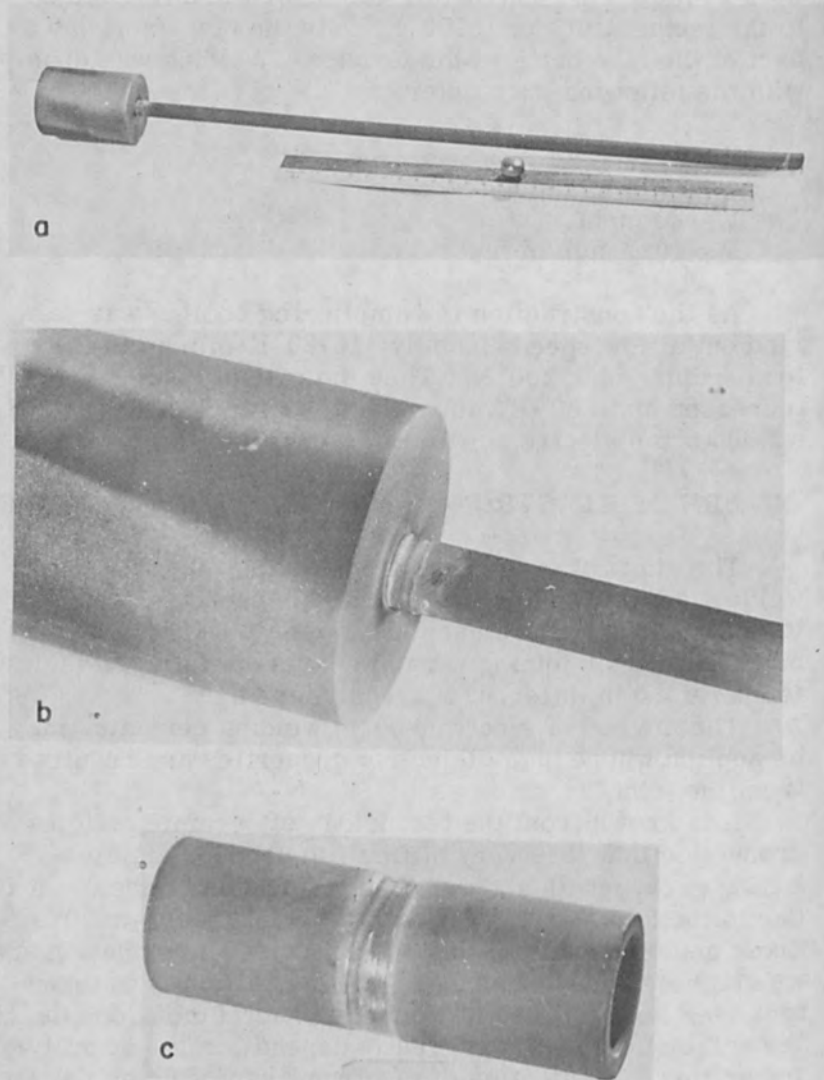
Samples of welding ceramics by an electron beam. (a) welding ceramics with 95% Al_2O_3 content, (b) welding ceramics with 99% Al_2O_3 content, (c) welding ceramics of different types (95% Al_2O_3 content).
